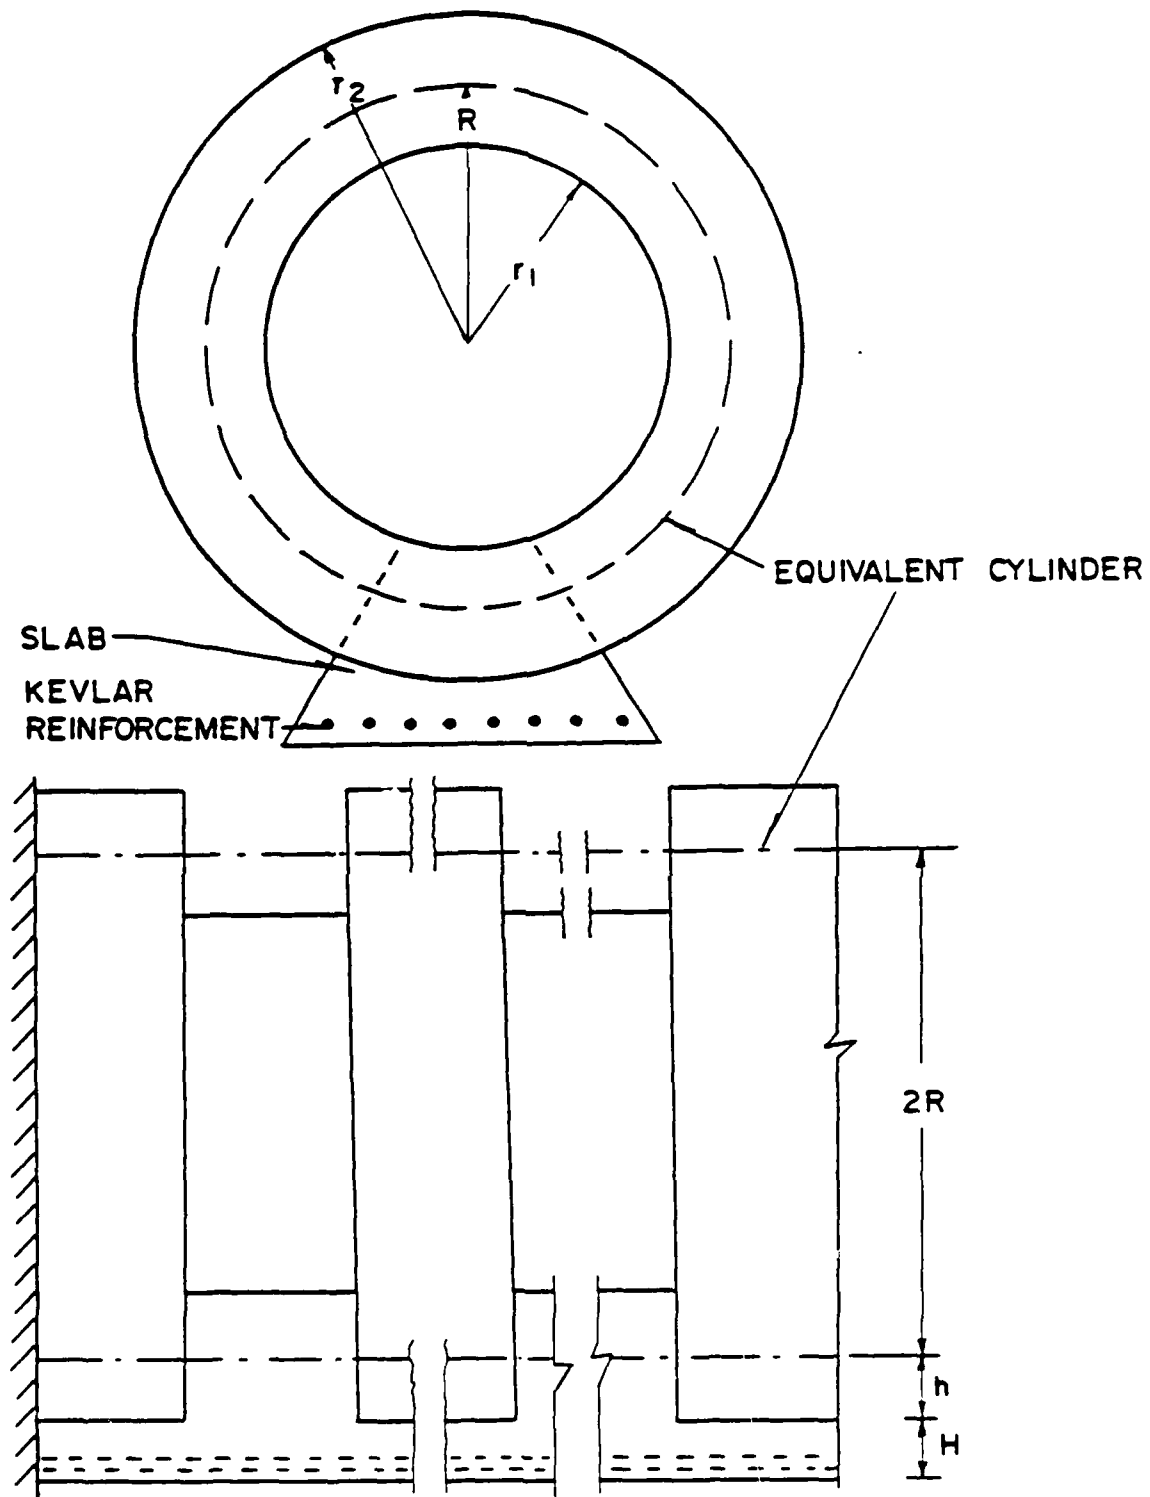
Cross section and elevation view of single-sided bellows with kevlar reinforcement on the underside.
